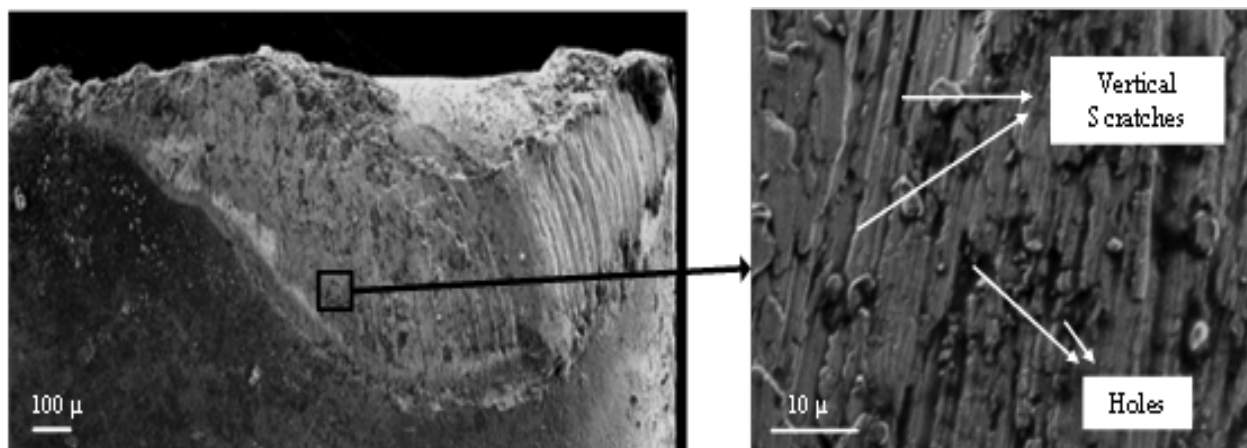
SEM image of the tool flank face, showing the holes and vertical scratches as the result of two body and three body abrasion wear mechanisms occurred during machining of Ti-MMCs at $V= 60$ m/min, $f= 0.15$, $a_p= 0.2$, with carbide tool (Seco TH1000)
